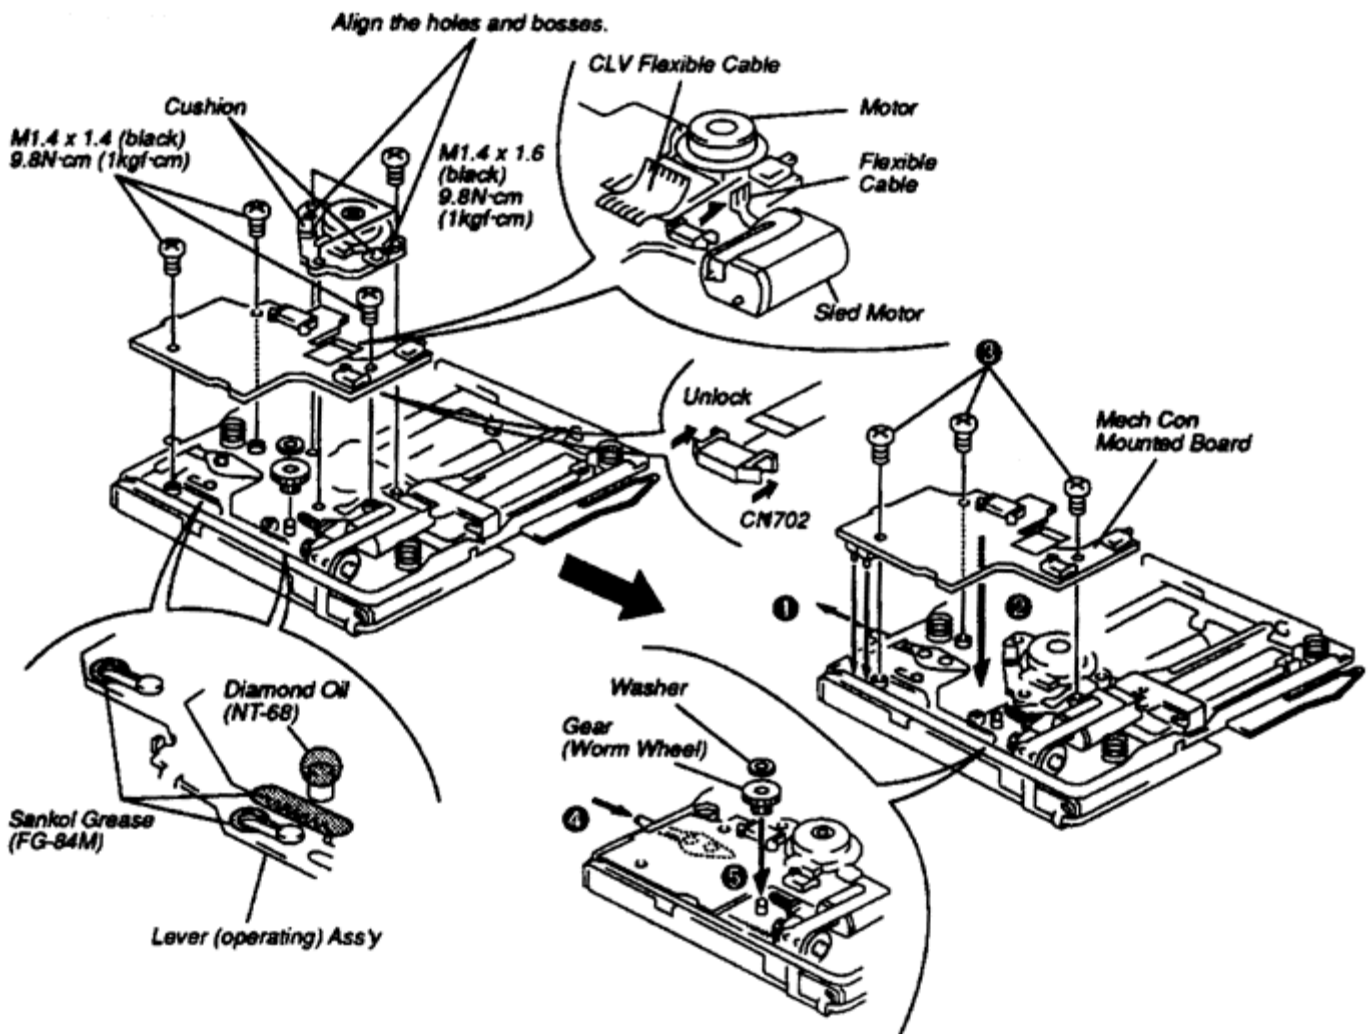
(d) Mech Con Mounted Board Replacement and Oil/Grease Application Location
